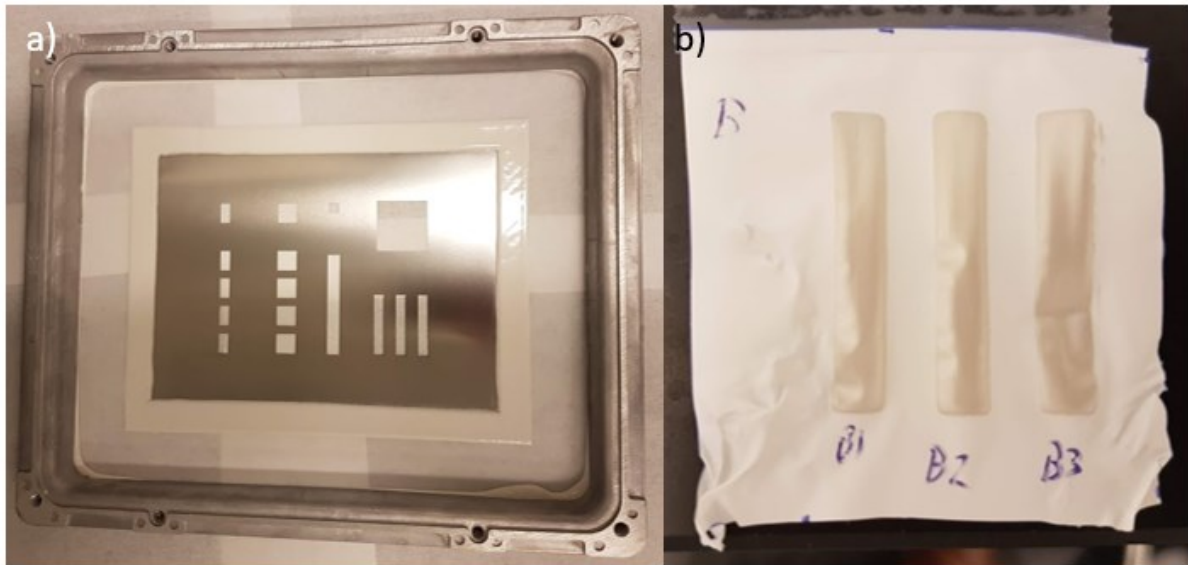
a) The stencil used for printing the ECA samples. The pattern in the bottom right was used for printing samples for flexibility and conductivity tests, while the pattern in the top right was used for printing samples for single-lap shear tests. b) A printed and cured sample for flexibility tests.
